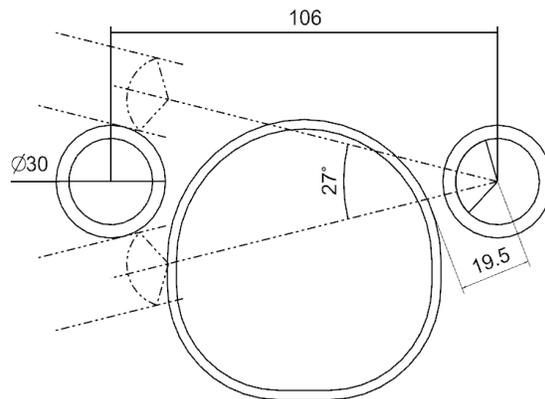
Placement of Engine Nacelles: Rotor Non-Containment
